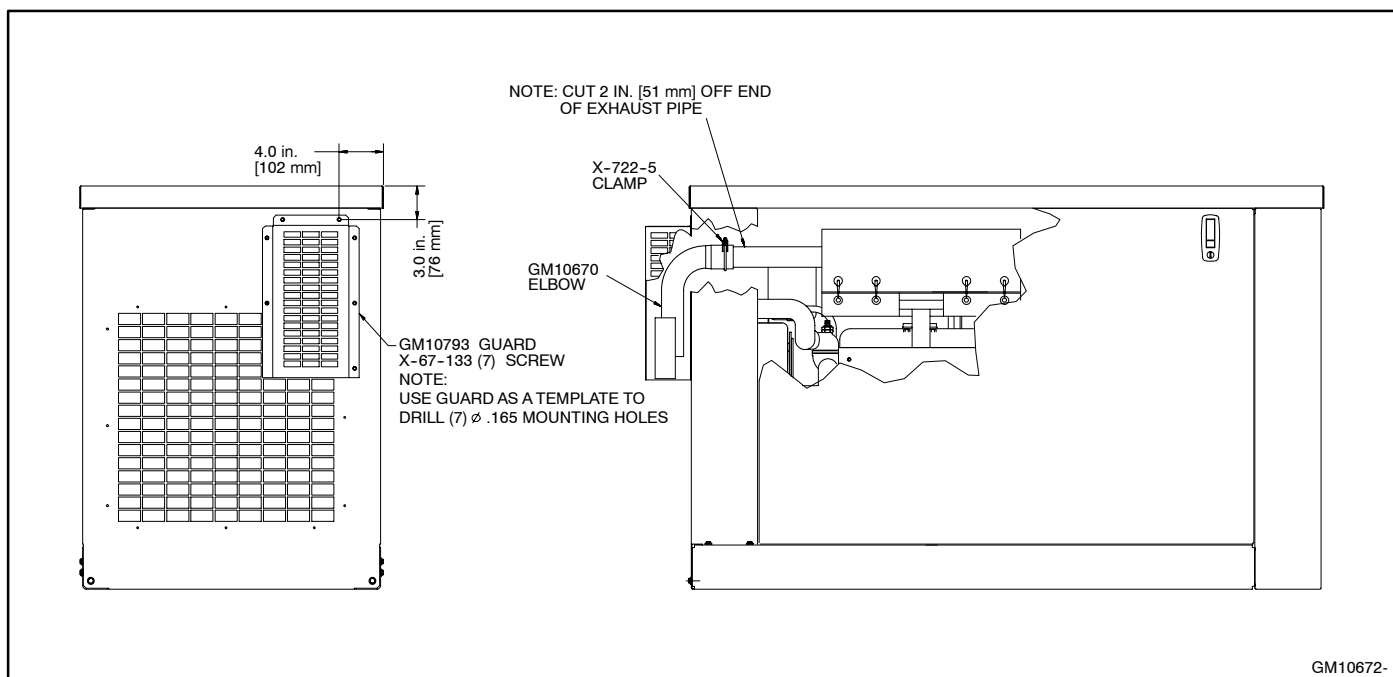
Installed Exhaust Guard and Elbow Kit GM10672-KP1, 17/22RY Generator Sets
